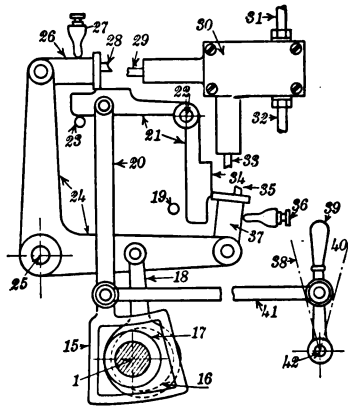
REVERSING GEAR OF CYLINDER OIL ENGINE
